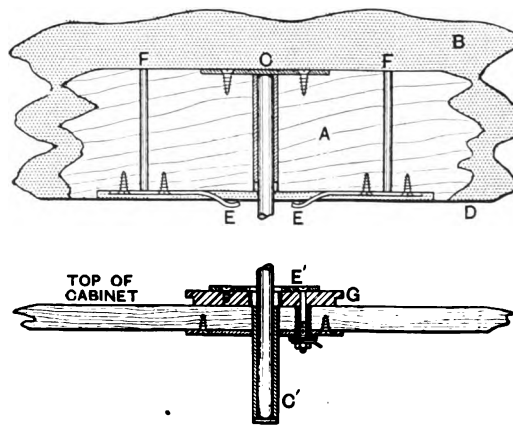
Details of the combined spindle and contact arrangements for the frame. [The disc G is undercut to take the compass card.
